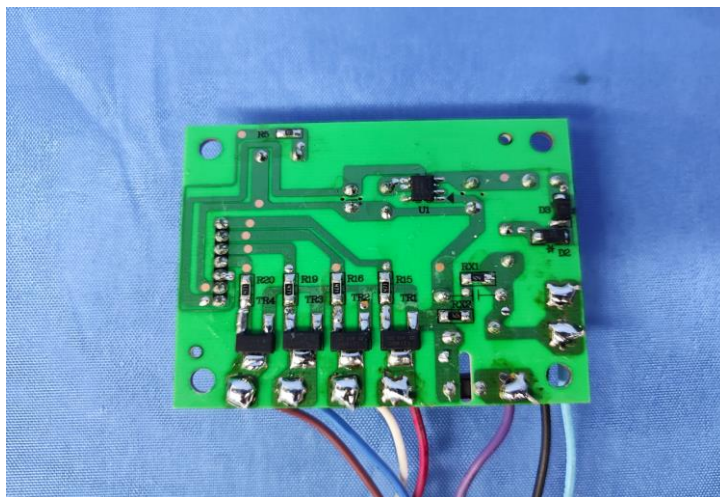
Display and control PCB view for NDTFT23R and NDTFT23RH
